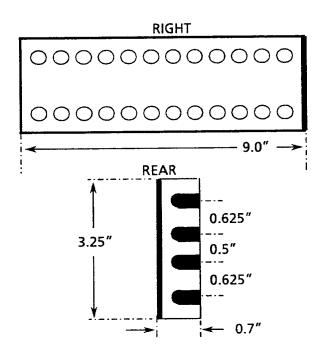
Dimensions of the adjustable rear rackmounting bracket
